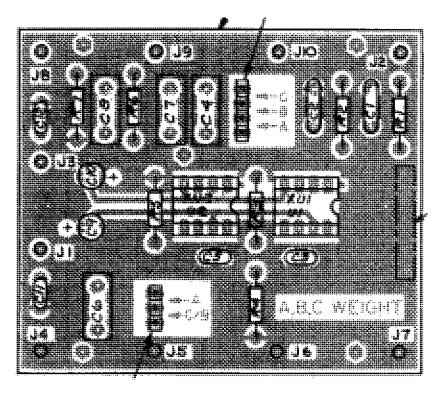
A,B,C WTNG Board A1A34,35,36 Parts Location Diagram.
